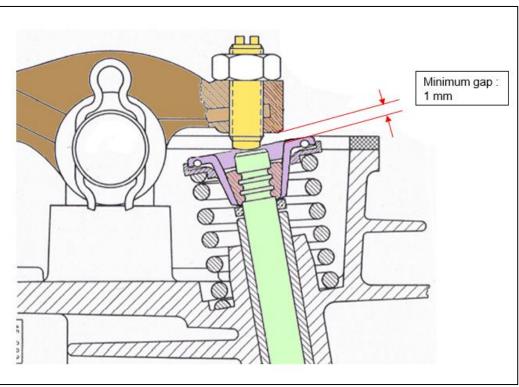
Minimum gap between the rocker arm and the rotator (When valve fully pushed in)
